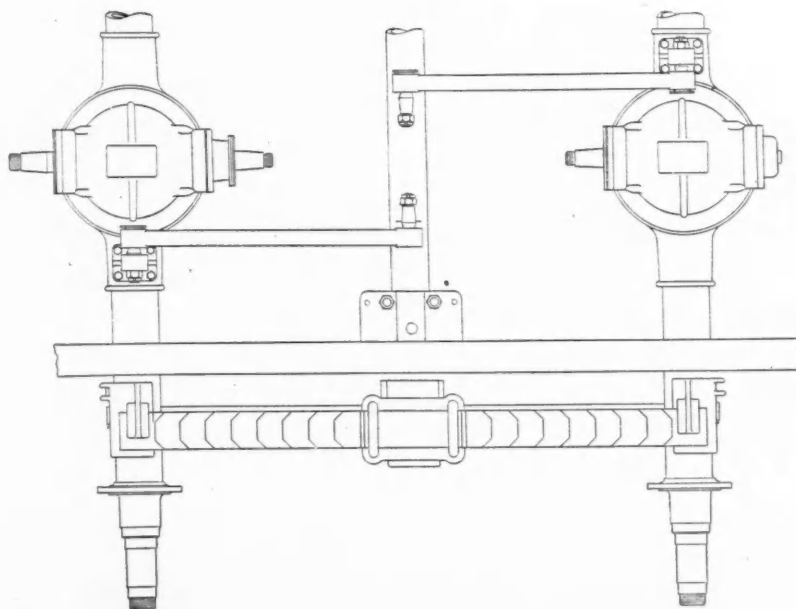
Plan view of the SW 75 four-wheel drive axle unit for smaller trucks
